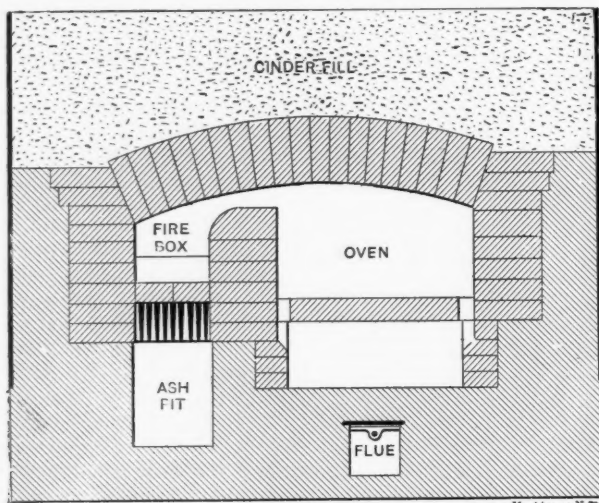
Longitudinal Section, Refitted Casehardening Furnace.
